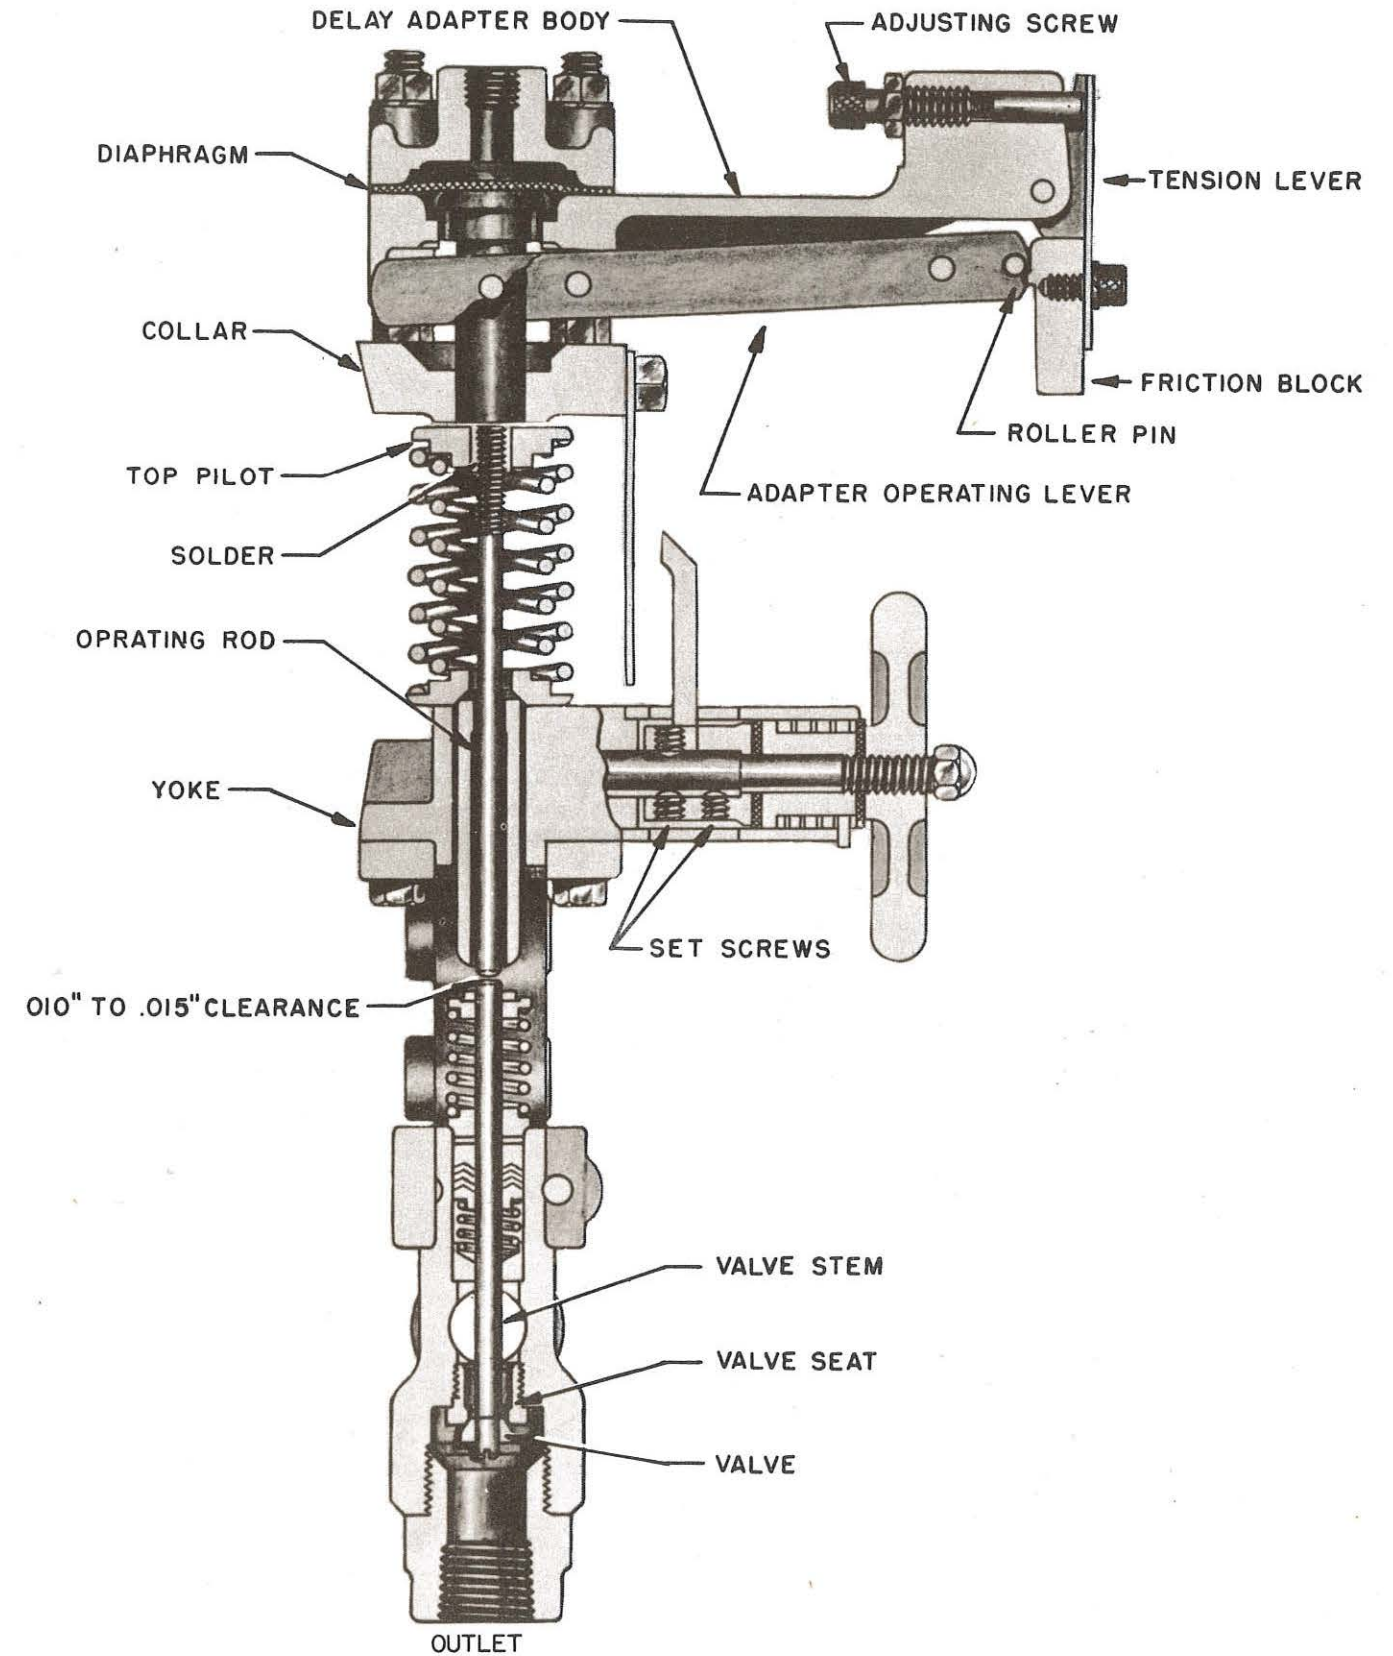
Water By-Pass Regulator With Delay Adapter.
